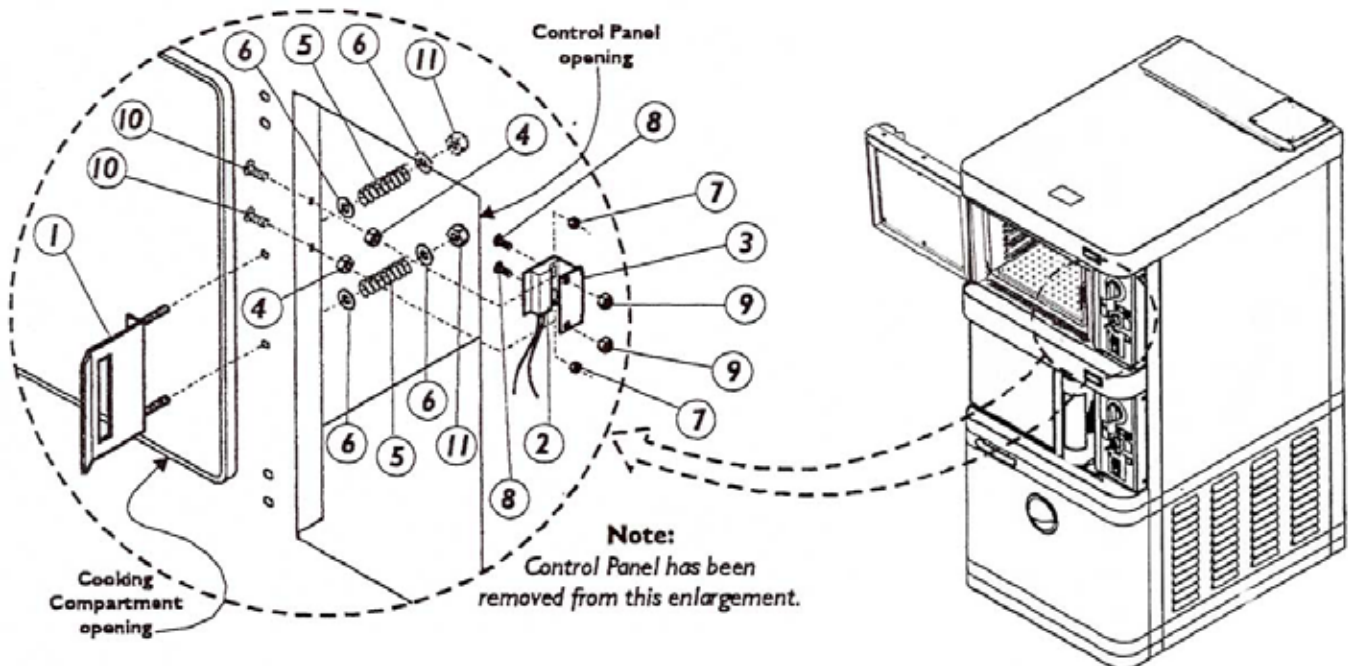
DOOR LATCH AND MAGNET SENSOR ASSEMBLY
